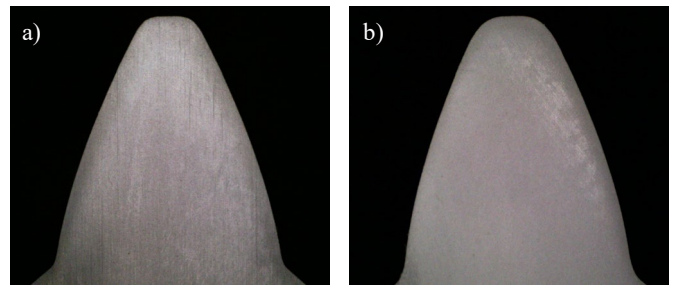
Cutting profile of tool 1: (a) SOL; (b) EOL.
